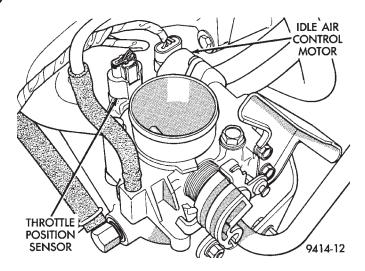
Idle Air Control (IAC) Motor and Throttle Position Sensor (TPS) Wiring Connectors.
